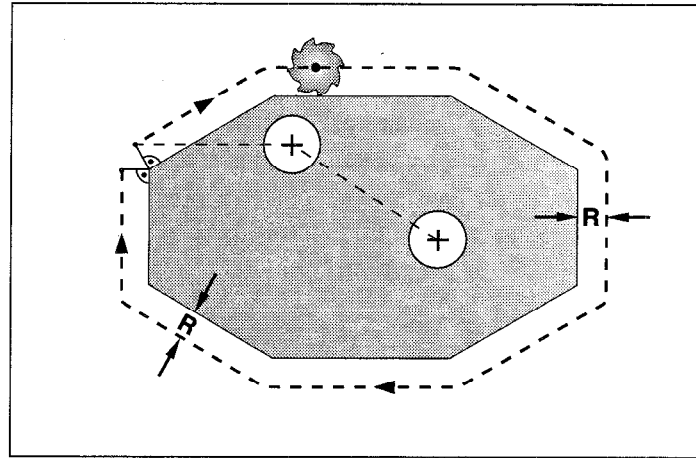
Programmed contour (—, +) and the path of the tool center (---)
